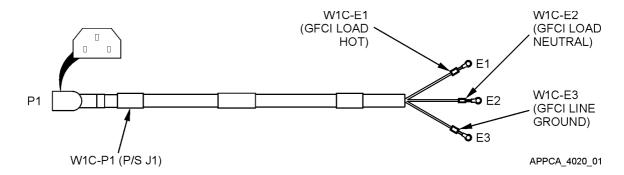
P/N 881319 W1C Cable Assembly (SICPS TENT)
